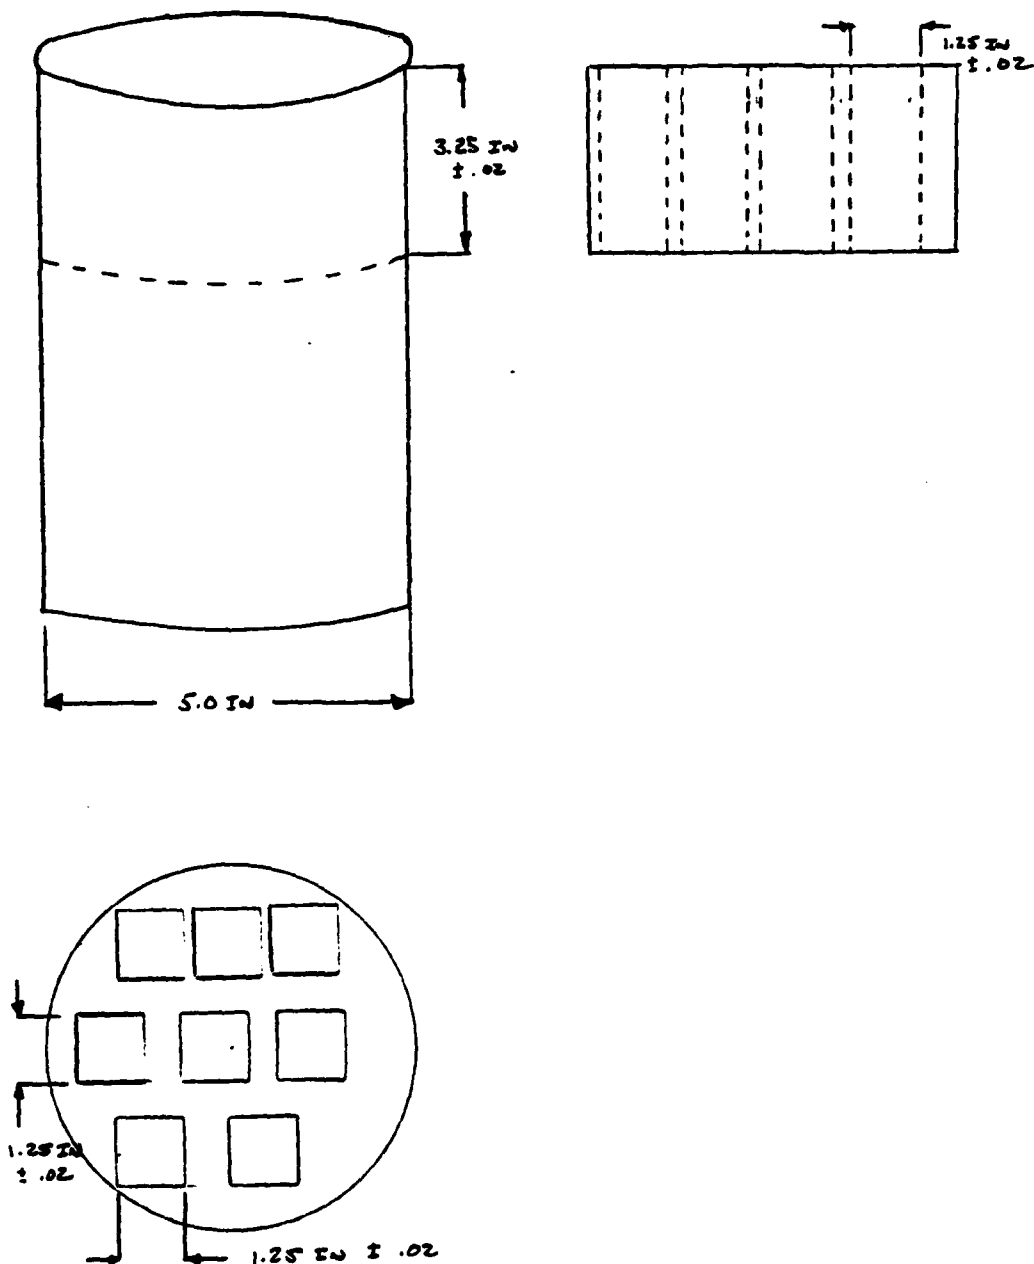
DIAGRAM SHOWING THE SECTIONING OF THE AS-CAST INGOT TO OBTAIN BILLETS FOR THERMO-MECHANICAL PROCESSING.
